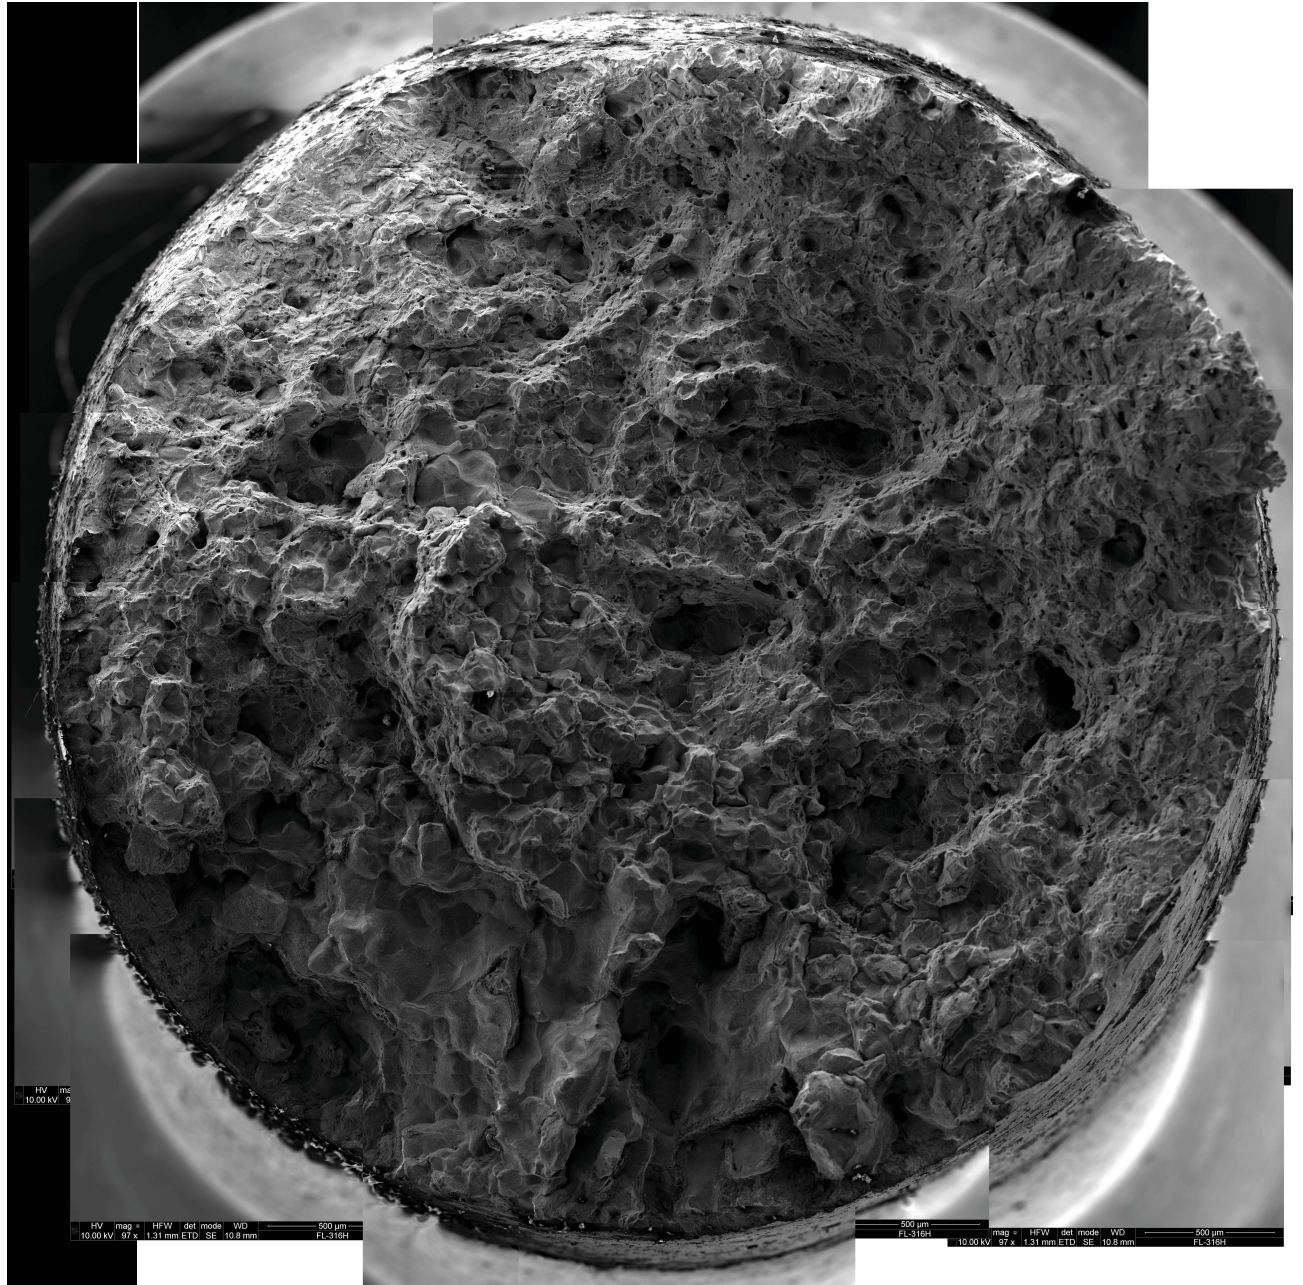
Global view of fracture surface for EDF-N-290-RBT test.
